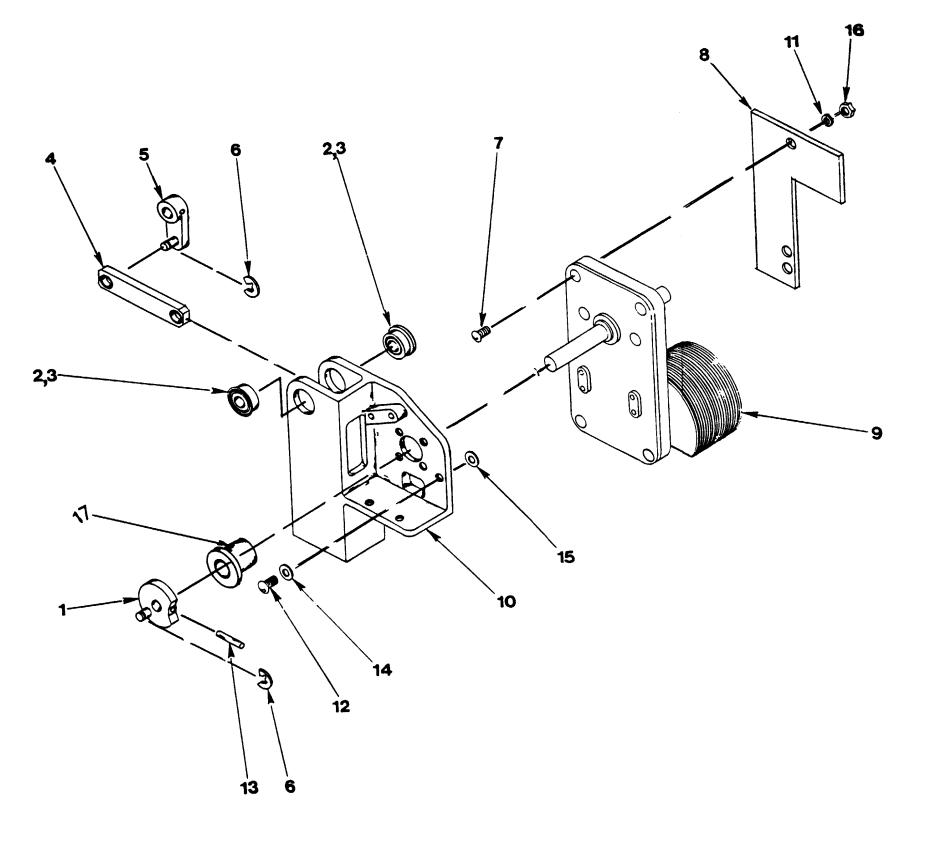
MODEL 550GT CUTTER SUPPORT ASSEMBLY
